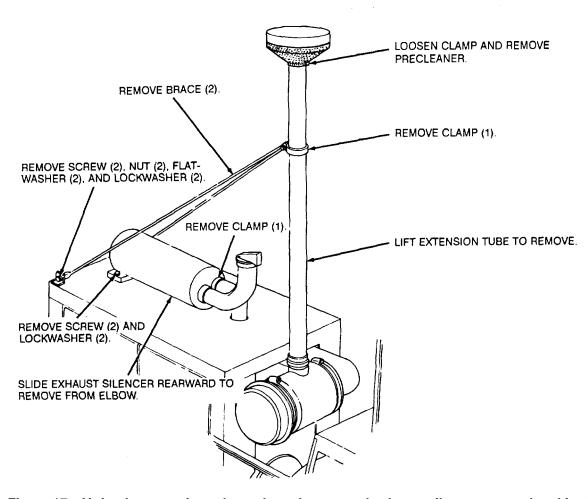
Air intake extension tube and precleaner, and exhaust silencer removal and installation.
